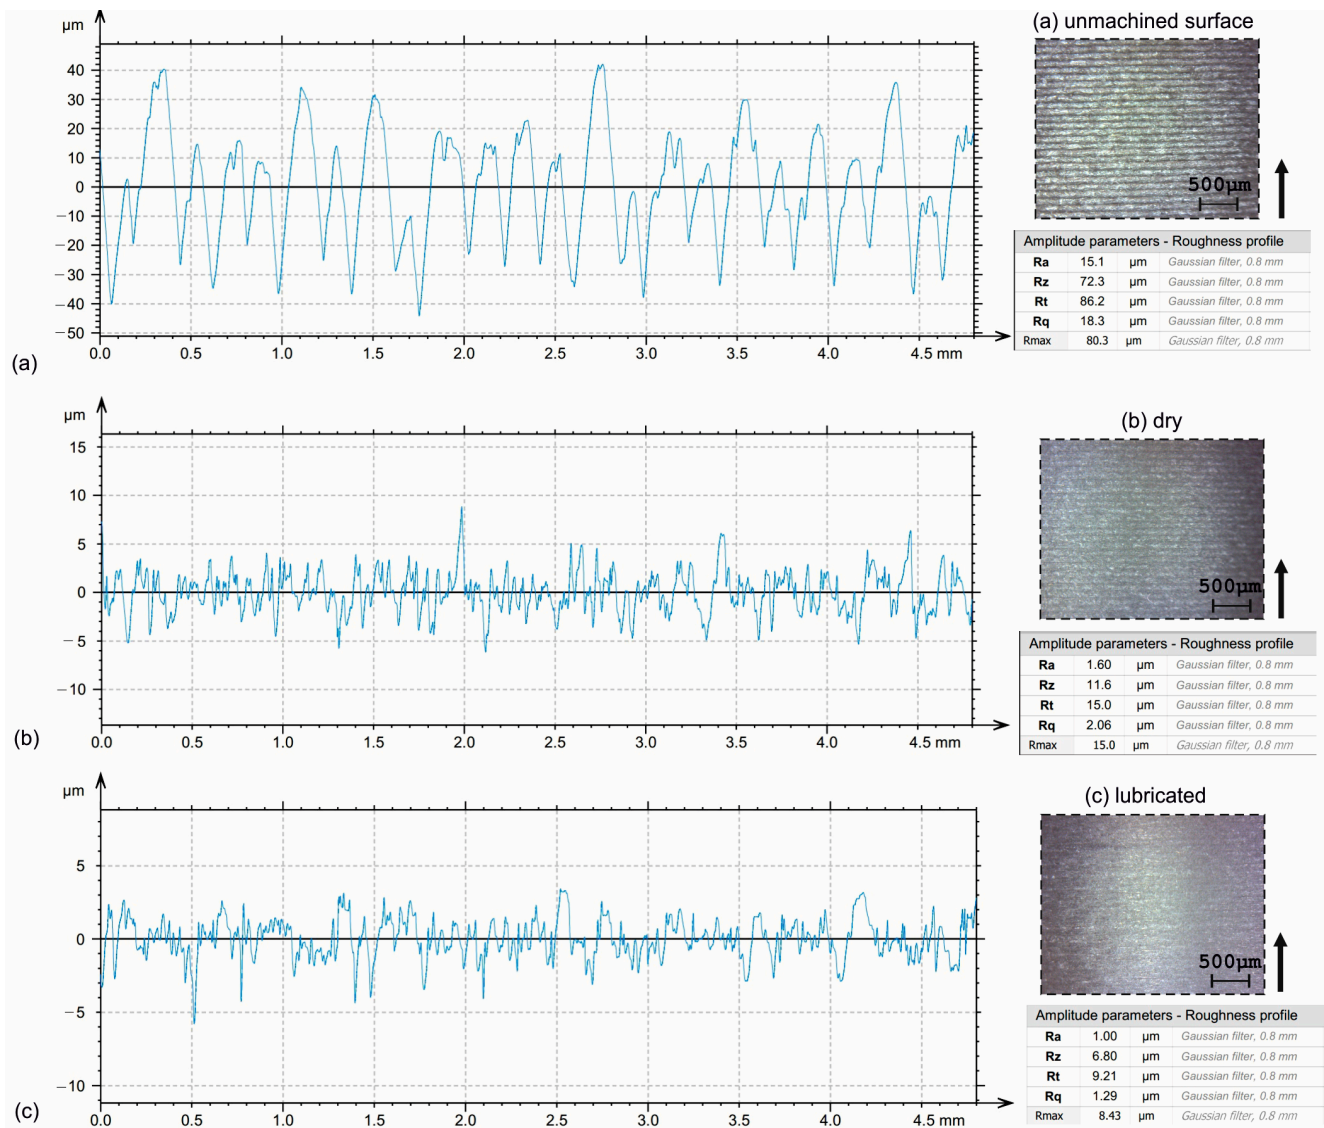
Sample roughness profiles and macro images of: (a) the unmachined surface, (b) dry machined surface, and (c) lubricated machined surface. The arrow indicates the measurement direction.
